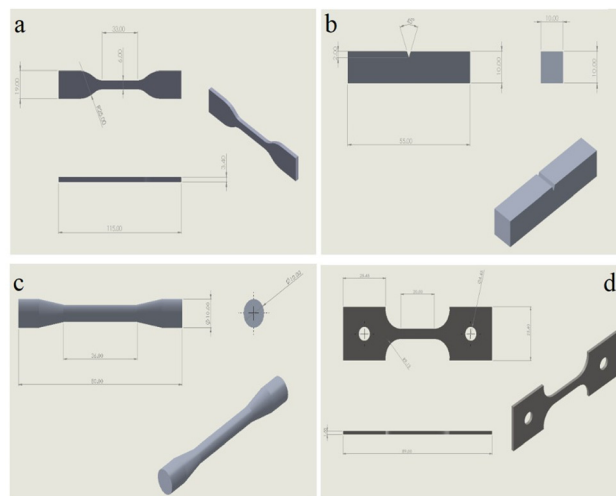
3D design for the examination samples. (a) CAD model for tensile specimen. (b) CAD model for impact specimen. (c) CAD model for torsion specimen. (d) CAD model for creep specimen.
